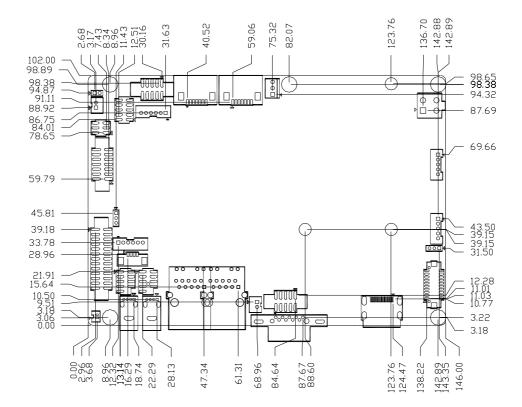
PCM-9363 HDMI mechanical drawing (top View)
